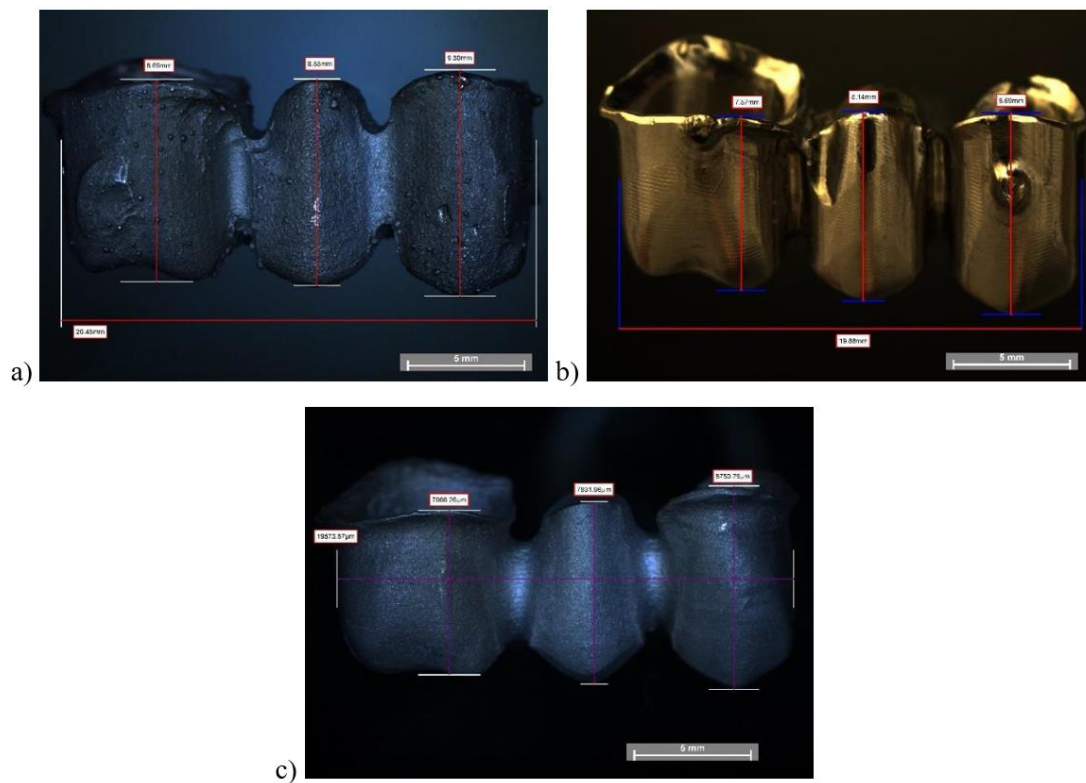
Macroscopic image representing the dimensional analysis of experimental samples obtained by: a) classical casting; b) milling; c)selective laser melting – side view
